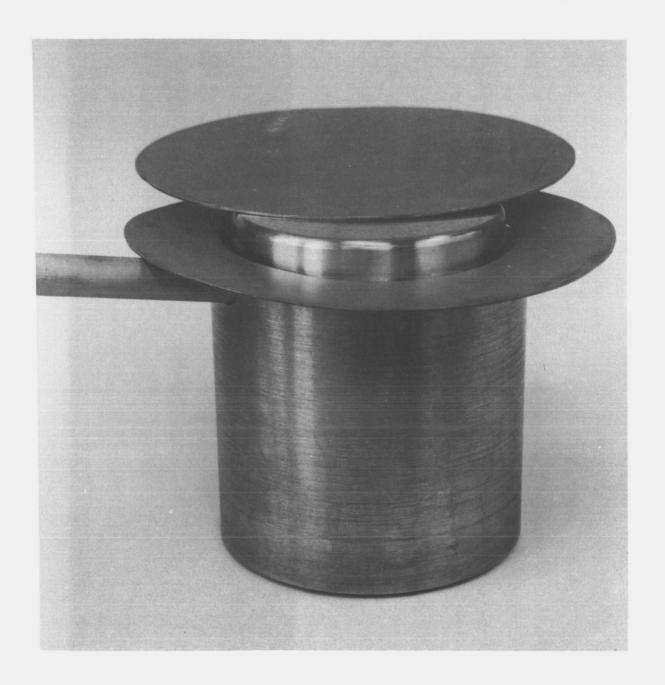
Final Simulated Impeller Sample Showing Pre-Bond Assembly After Lay Up Prior to Welding of Retort
